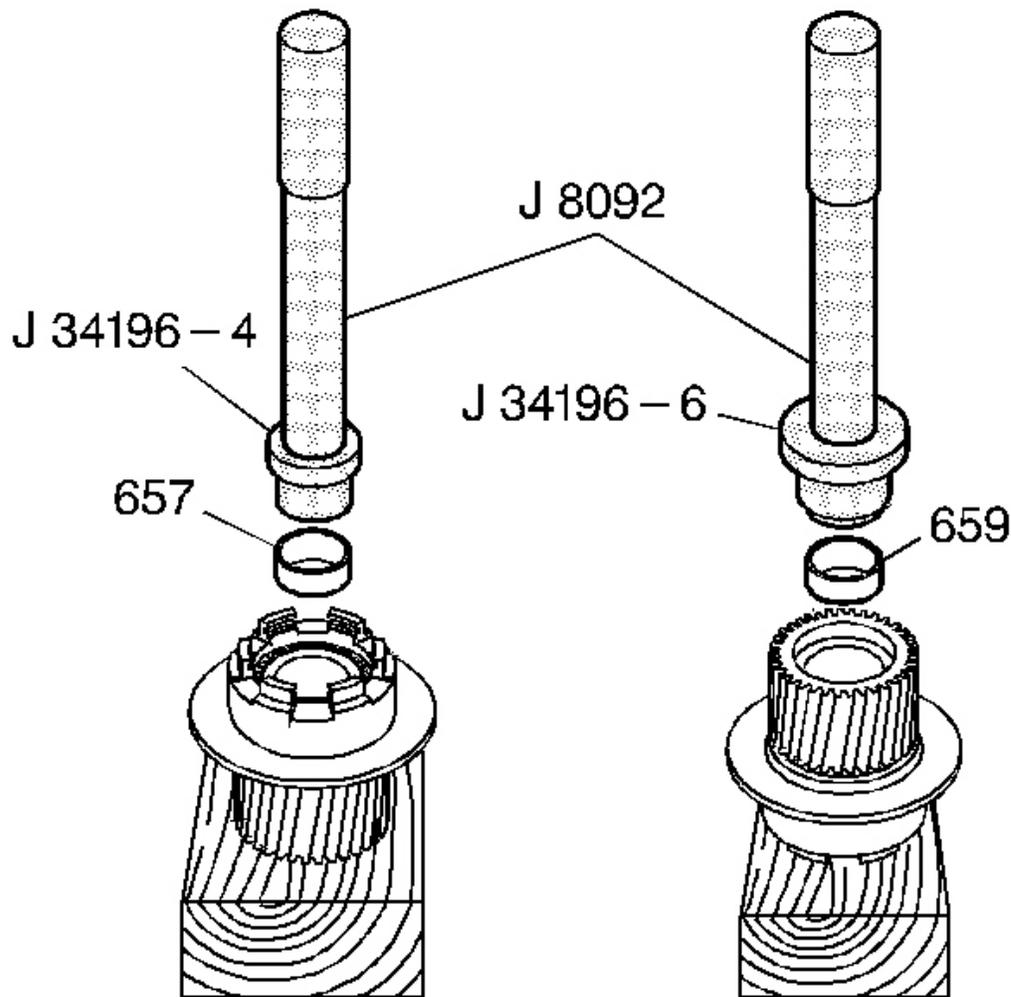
Input Sun Gear Front Bushing & Rear Bushing
